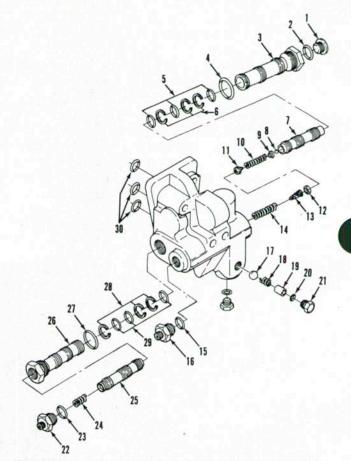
Exploded view of priority valve assembly used on tractors manufactured April 1985 and after.
